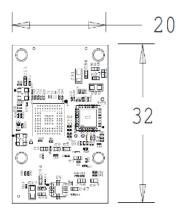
e-CAM136\_MI1335\_ADP Board Mechanical Dimension (Bottom View)
